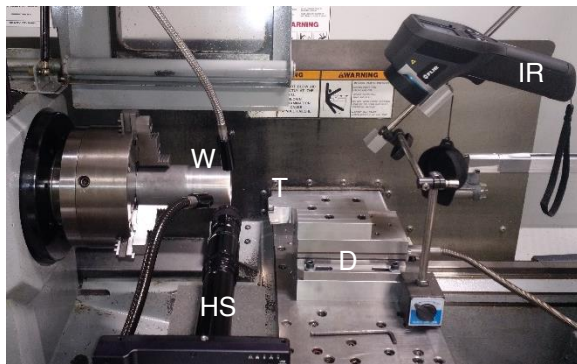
Orthogonal tube turning setup including: workpiece (W), tool (T), high-speed camera, (HS), infrared camera (IR), and dynamometer (D).
